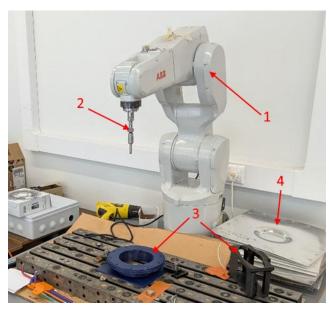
System setup example of plastic sheet forming, here: I - ABB IRB 1200; 2 - toolhead with rounded end for smooth pressing; <math>3 - printed sheet holders to keep samples in place; 4 - formed metal sheets
